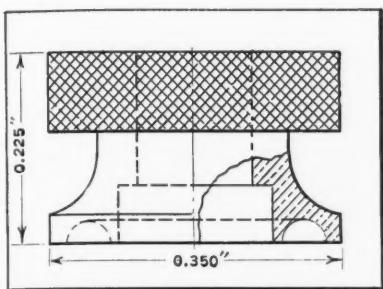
Brass Knob Made in Machine Shown in Fig. 1
